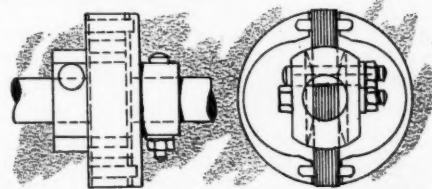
Magneto coupling in which the drive is taken through a laminated steel spring
